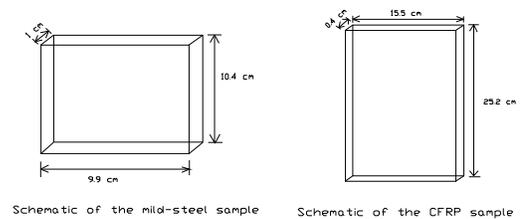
Dimensional layouts of the (a) Mild steel, and (b) CFRP samples
